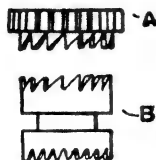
Winding Pinion and Shifting Sleeve of Keyless Watch
